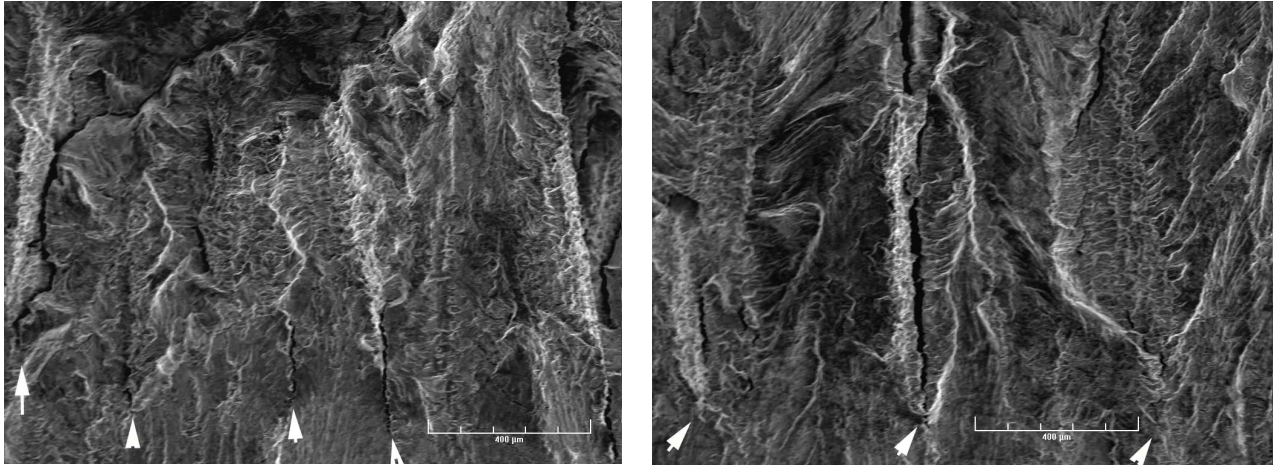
Secondary, out of plane cracks are indicated by white arrows on the fracture surface of specimen A152-TS-5, region IG-1. Crack advance is from bottom to top.
